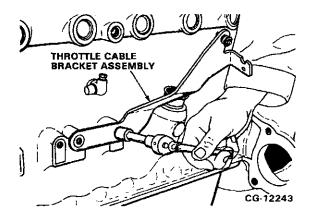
Remove the Throttle Cable Bracket Assembly
